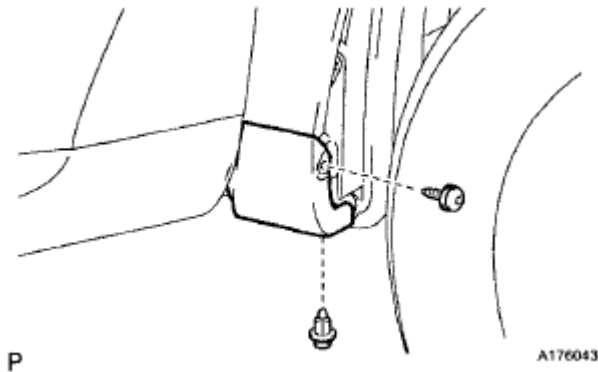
Identifying Front Fender Moulding Sub-Assembly RH And Screw
